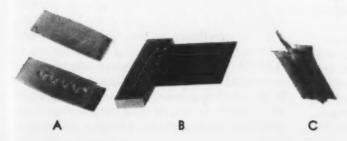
Parts of similar thickness are wave welded in A. A thin sheet is attached to a heavy rectangular section with a stagger weld at B. For smoothness on both surfaces, parts can be sandwich welded as in C.
